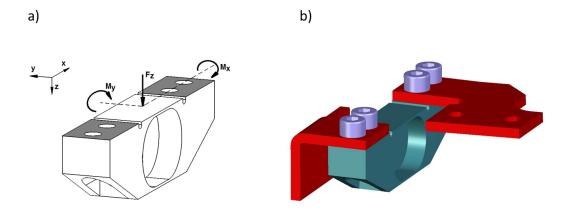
a) Direction of measured force; b) Force sensor and assembly components
